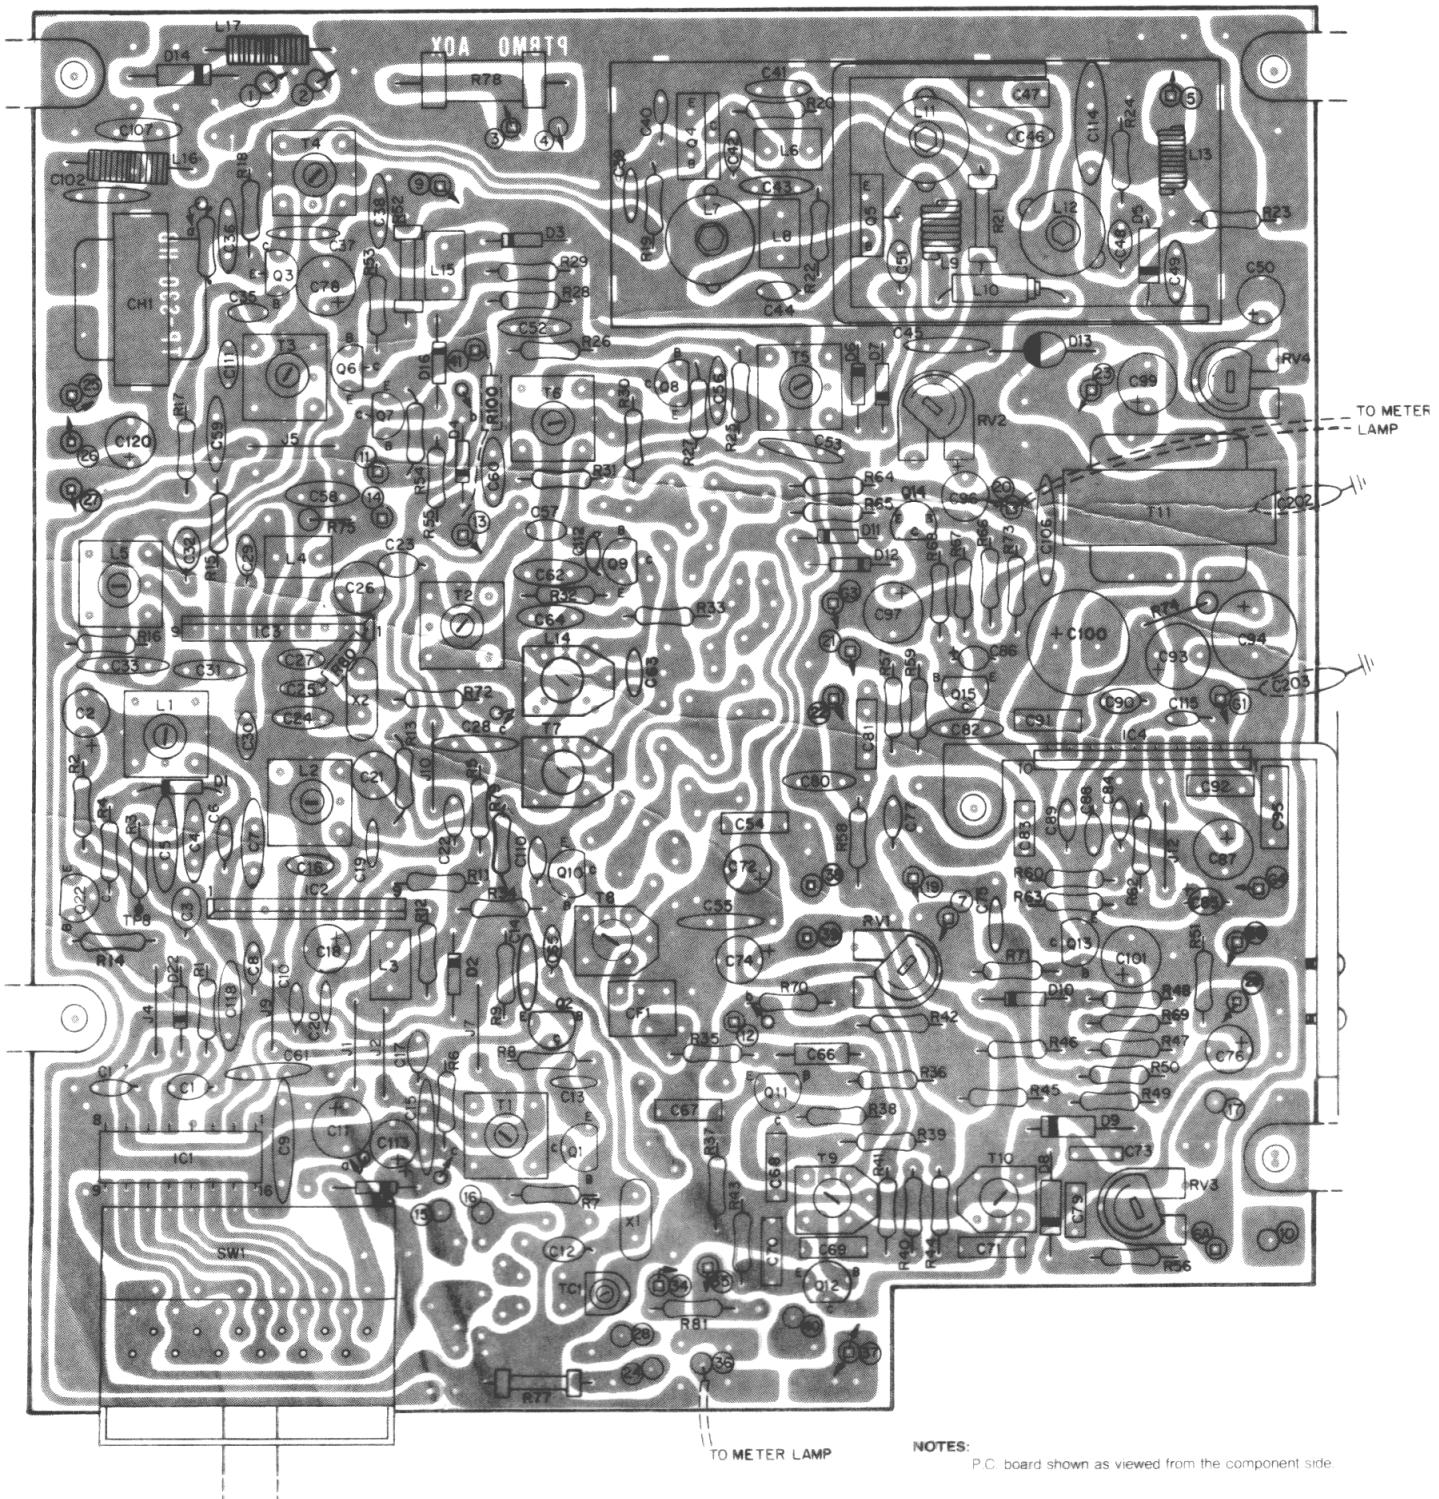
Main P.C. Board Component Outline, Model 2702
